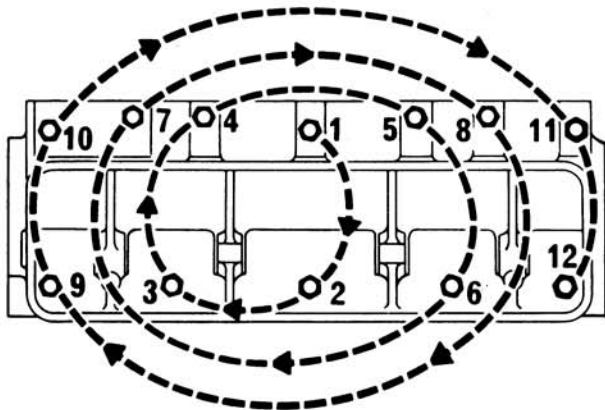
RECOMMENDED CYLINDER HEAD TORQUE SEQUENCE
